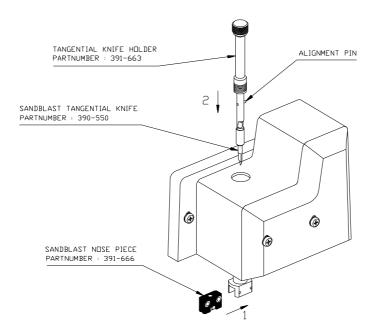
NOSE PIECE AND KNIFE INSTALLATION FOR CUTTING MASKING STENCILS OR HEAVY MATERIALS
